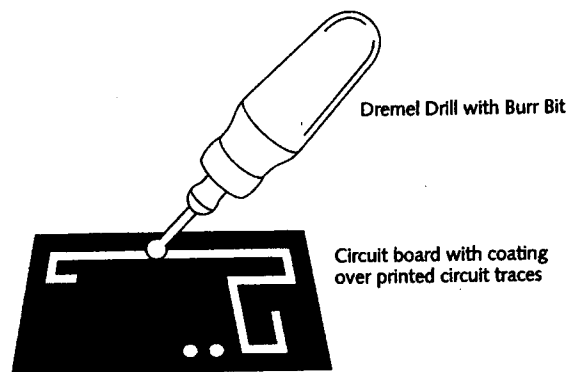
Use only the lightest pressure to remove a printed circuit's top coating.
